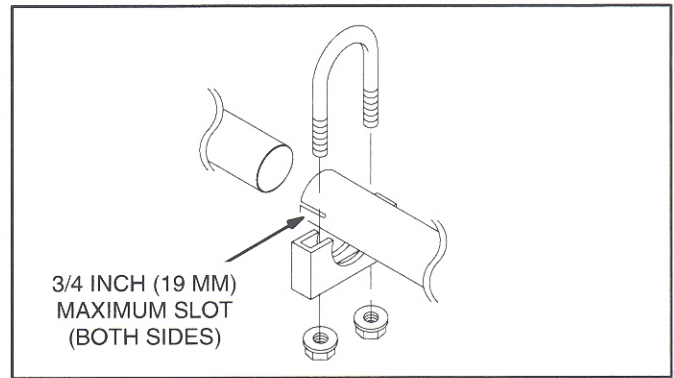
EXHAUST TAIL PIPE CONNECTIONS
